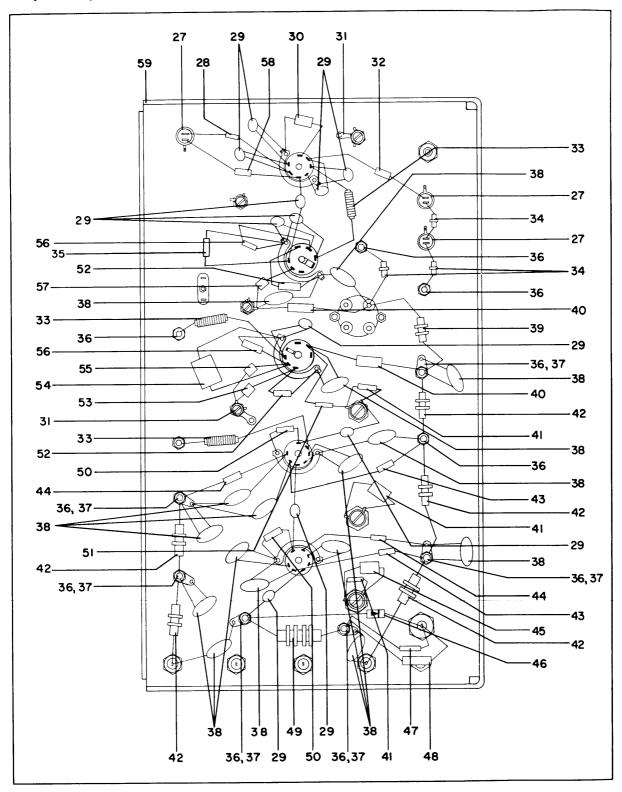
Narrow Band Chassis and Cover Assembly, Bottom View (Sheet 2 of 2 Sheets), Index Nos. 27 through 59
